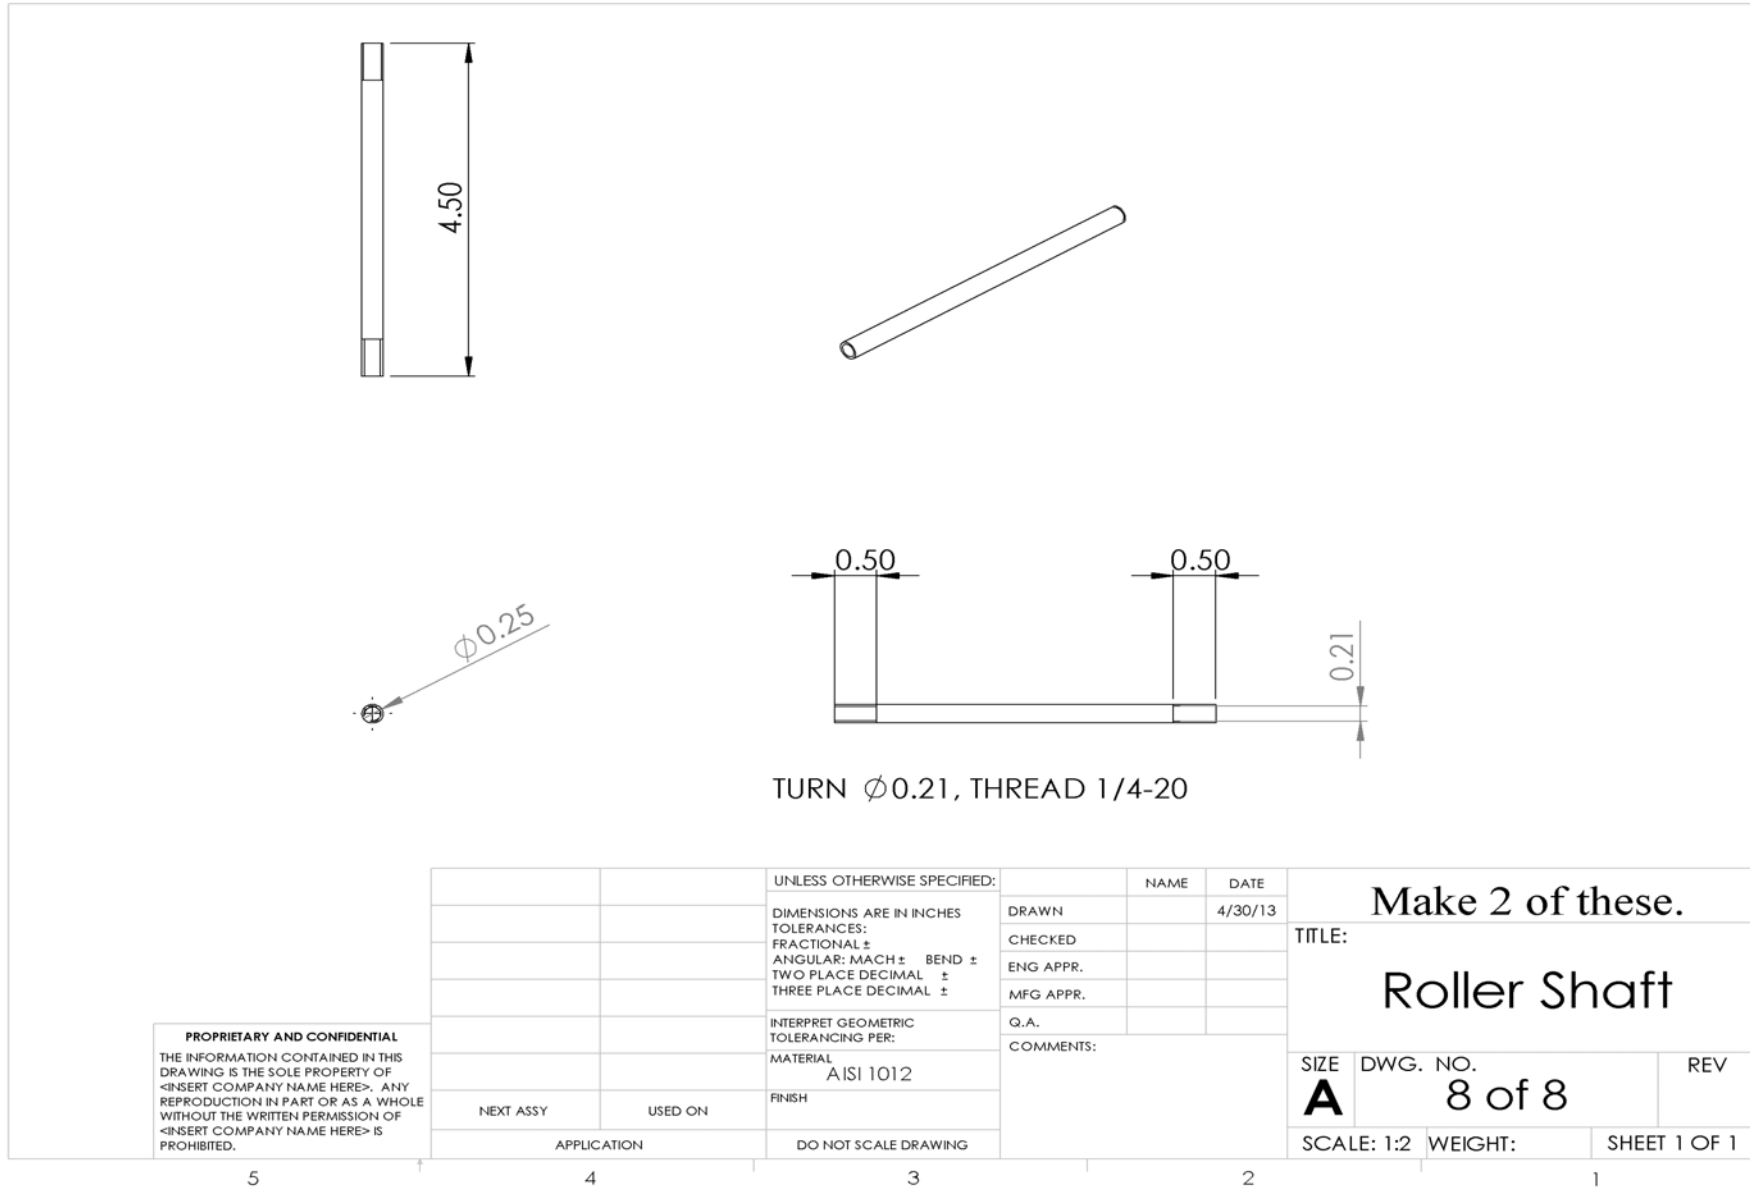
Roller Shaft*. Two of this part will be made and will connect loosely to the rollers by use of nuts and washers to maintain a distance between the roller locks. The tips of these parts have to be threaded in order to use the nuts.
